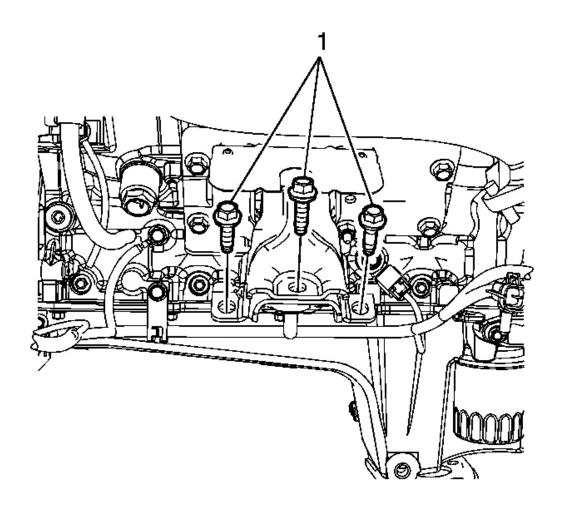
Engine Mount Replacement - Left Side Courtesy of GENERAL MOTORS CORP.
